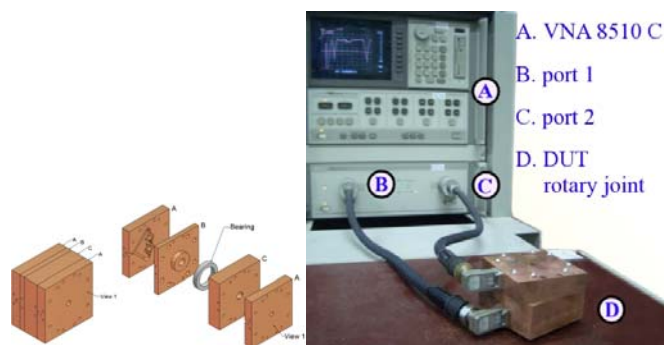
(a) Design drawing of the rotary joint - two converters joined back-to-back with a bearing. (b) Cold test setup. The measured circuit is calibrated. The rotary joint can rotate freely.
